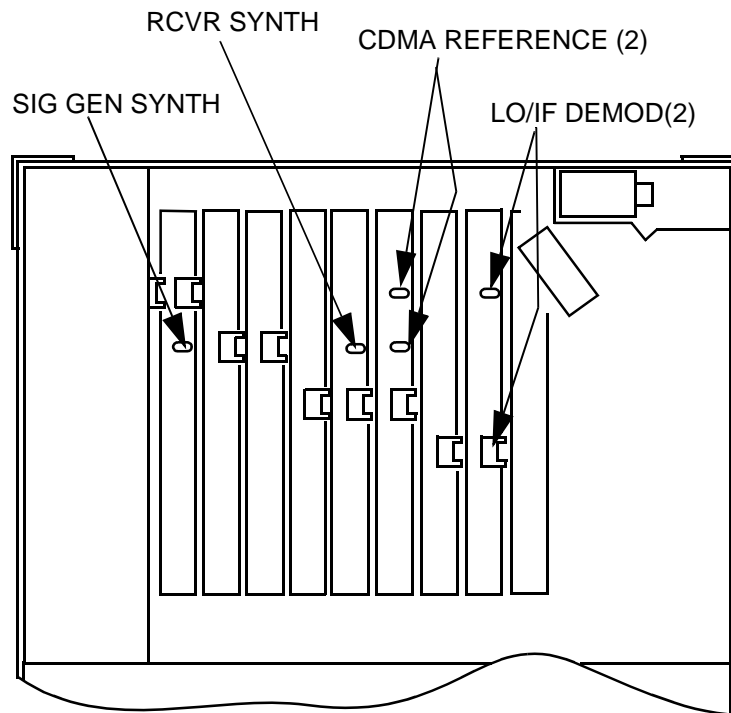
Locating the Out-Of-Lock (OOL) Indicators
